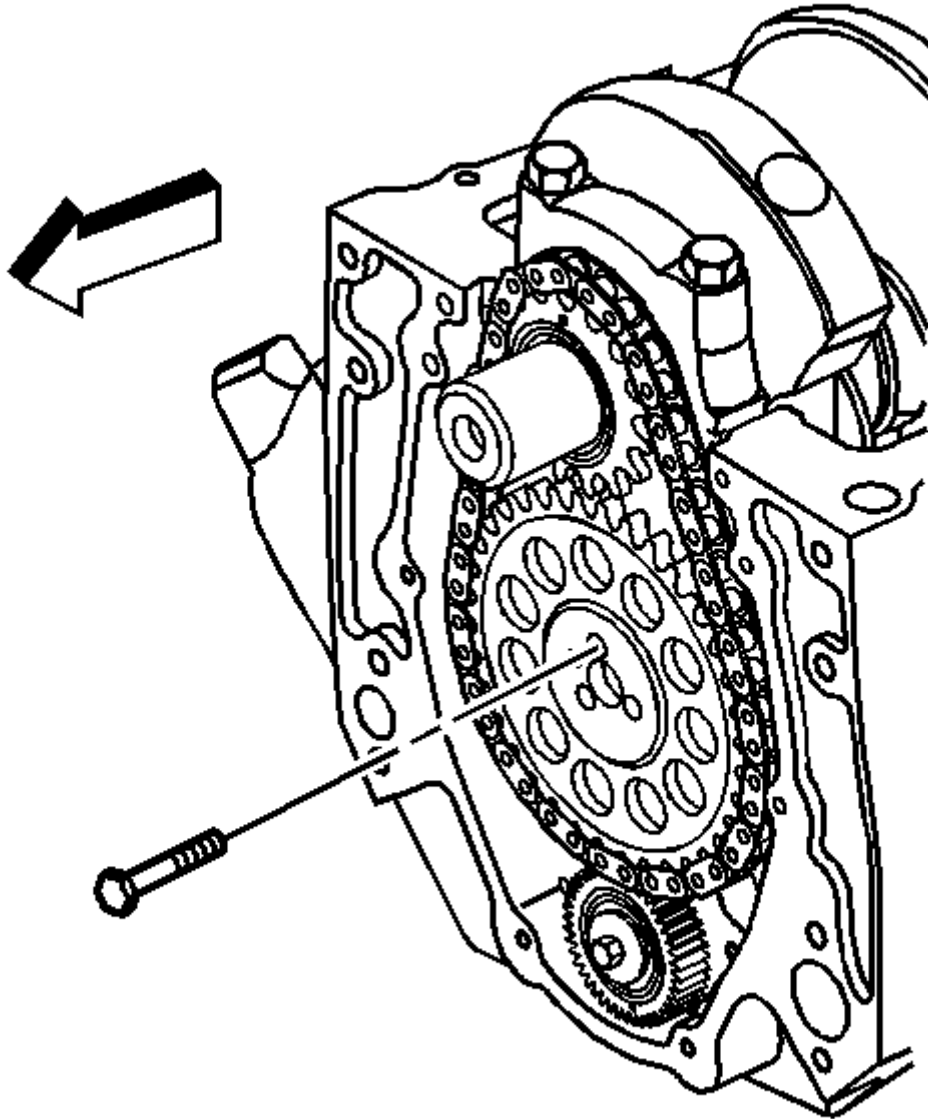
Camshaft Sprocket, Timing Chain & Slack Side
